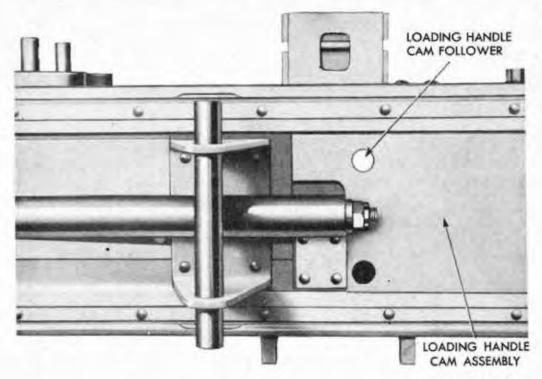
Adjustment of Loading Handle Cam Follower (Gun AN-M4)
